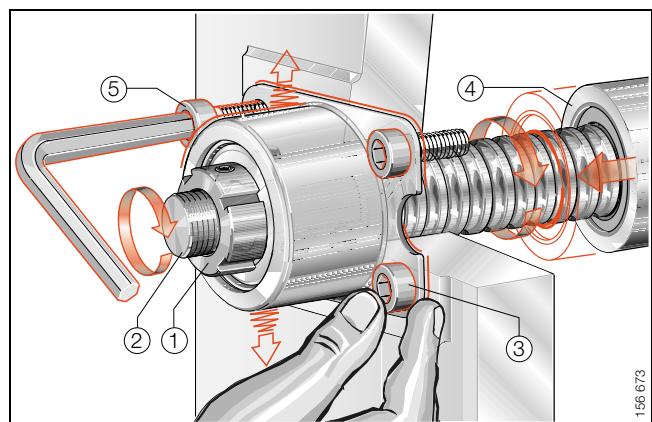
· Installation of a ZKLR bearing assembly on the screw/machine wall
